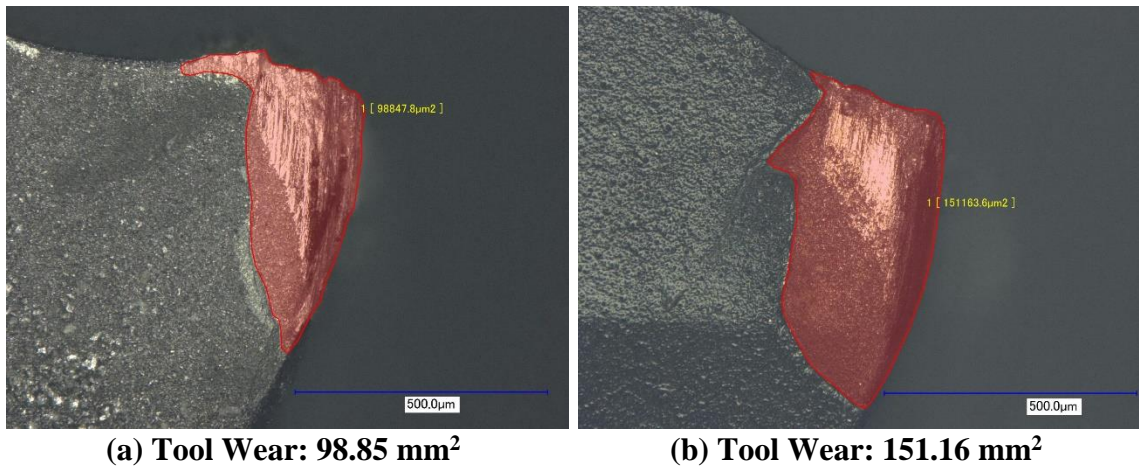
CVD diamond coated end mills (a) Tool wear from dry cutting experiments (b) Tool wear from wet cutting experiments [17].
